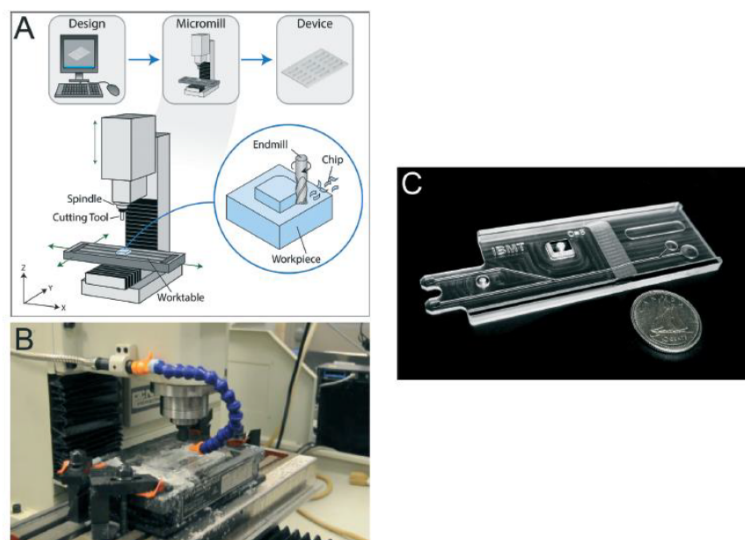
(A) A schematic of a CNC micro milling process. It consists of a worktable to provide planar motion, a cutting tool to remove material from the workpiece, and a spindle to spin the cutting tool and to provide vertical motion. (B) A picture of a CNC micro-mill during operation. (C) An image of a micro-milled thermoplastic device. Reproduced with permission [47]. Copyrights 2015. Royal Society of Chemistry.
